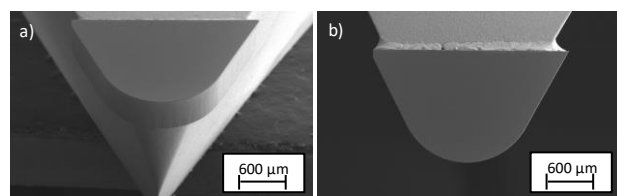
NPD turning tool, a) overall view and b) view of the rake face A_v
